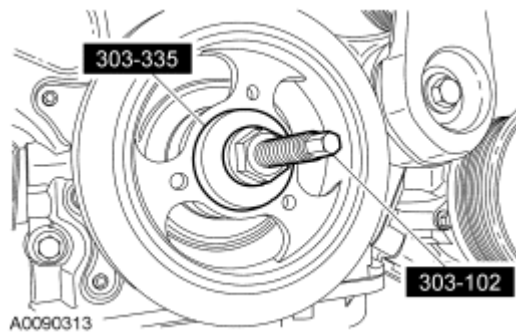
Installing Crankshaft Pulley Using Special Tools (303-102, 303-335)
